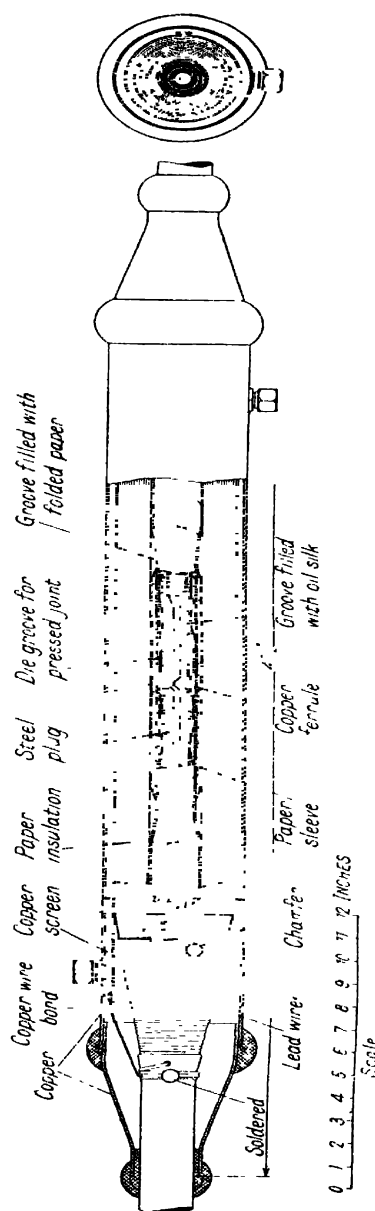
66 KV. OIL FILLED CABLE JOINT
